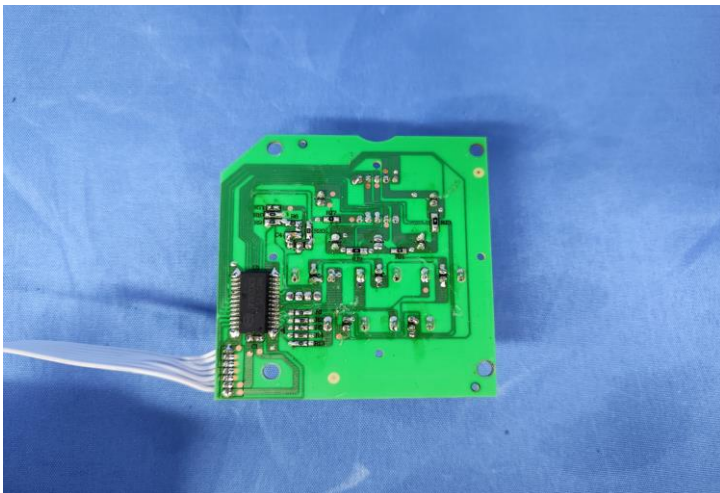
Display and control PCB view for NDTFT23R and NDTFT23RH
